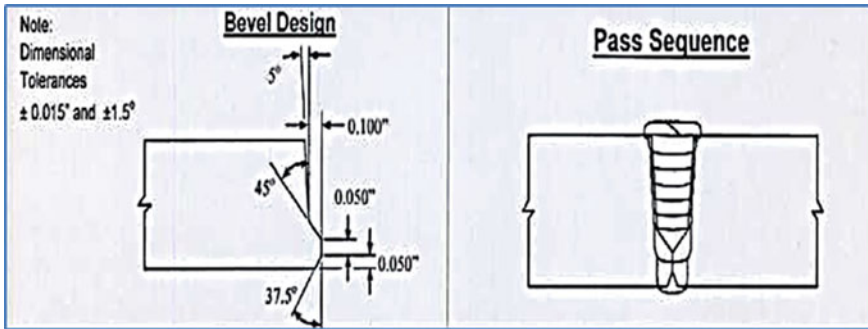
Weld joint for CRC-Evans weld machine
